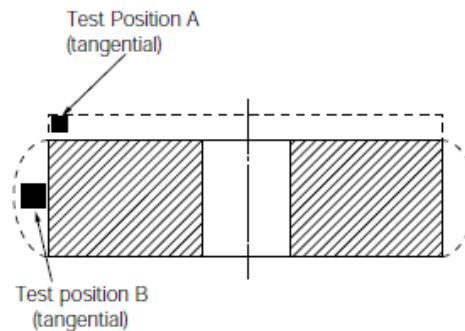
GEAR REIM (MADE BY EXPANDING)
